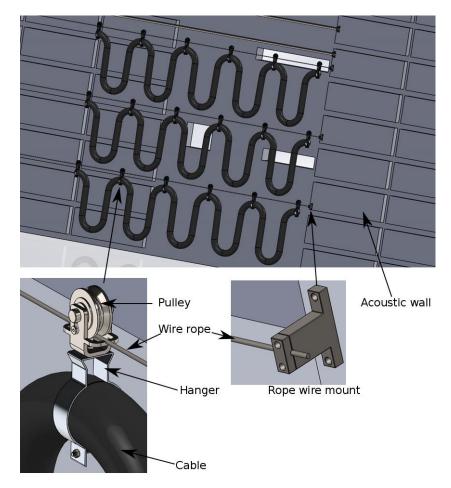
Instrumentation rack and shaft fitting for the guide loops design.
